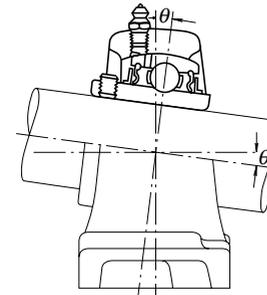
Permissible Misalignment of Ball Bearing Units
